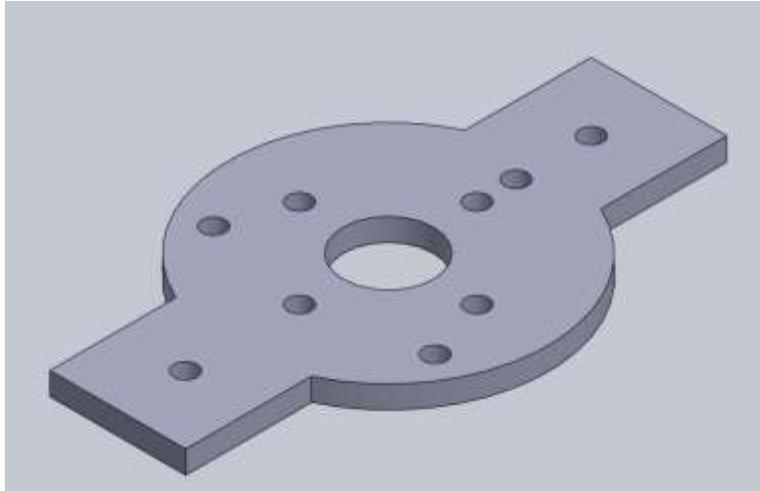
Motor Mount – Fixed on top of Aluminum Bar
